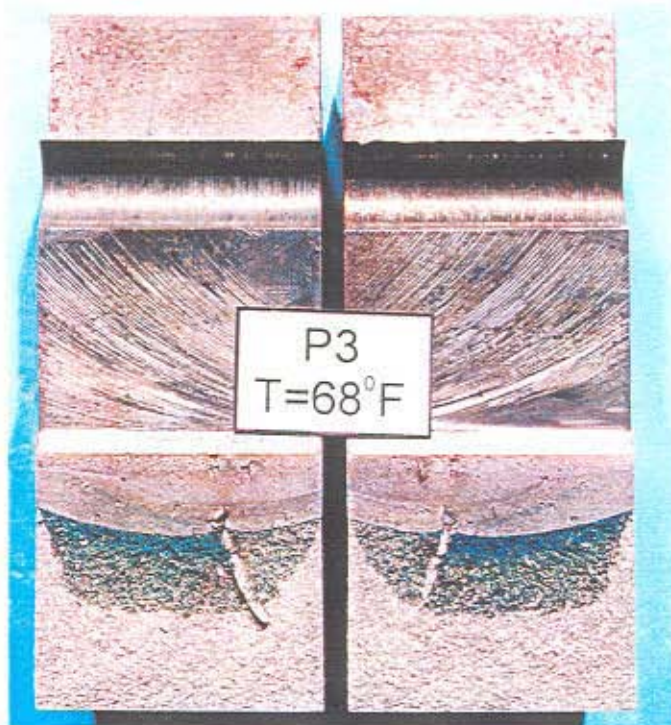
Fracture Surfaces of Test Specimen P3. (6/00/2-10)
